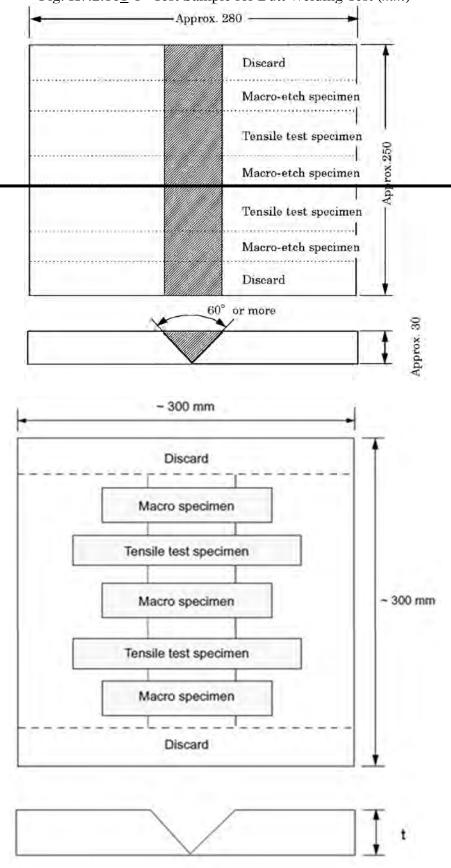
<u>01</u>-1 Test Sample for Butt Welding Test (*mm*)
